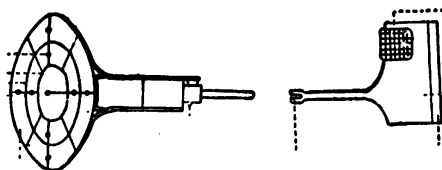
Heavy machine gun anti-aircraft sight.
